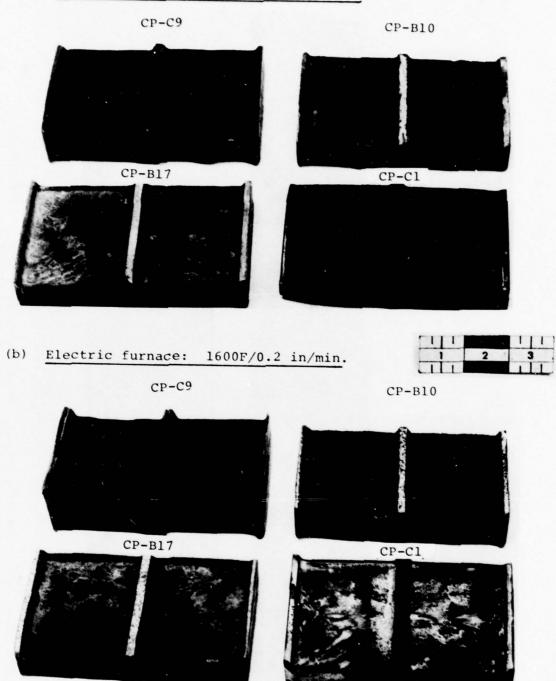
Side view of rib-and-web forgings produced from Phase II rib-and-web forging trials for several lubricants.
